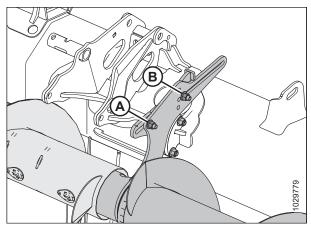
Initial Position of Adjustable Mounts – Three-Piece Auger
